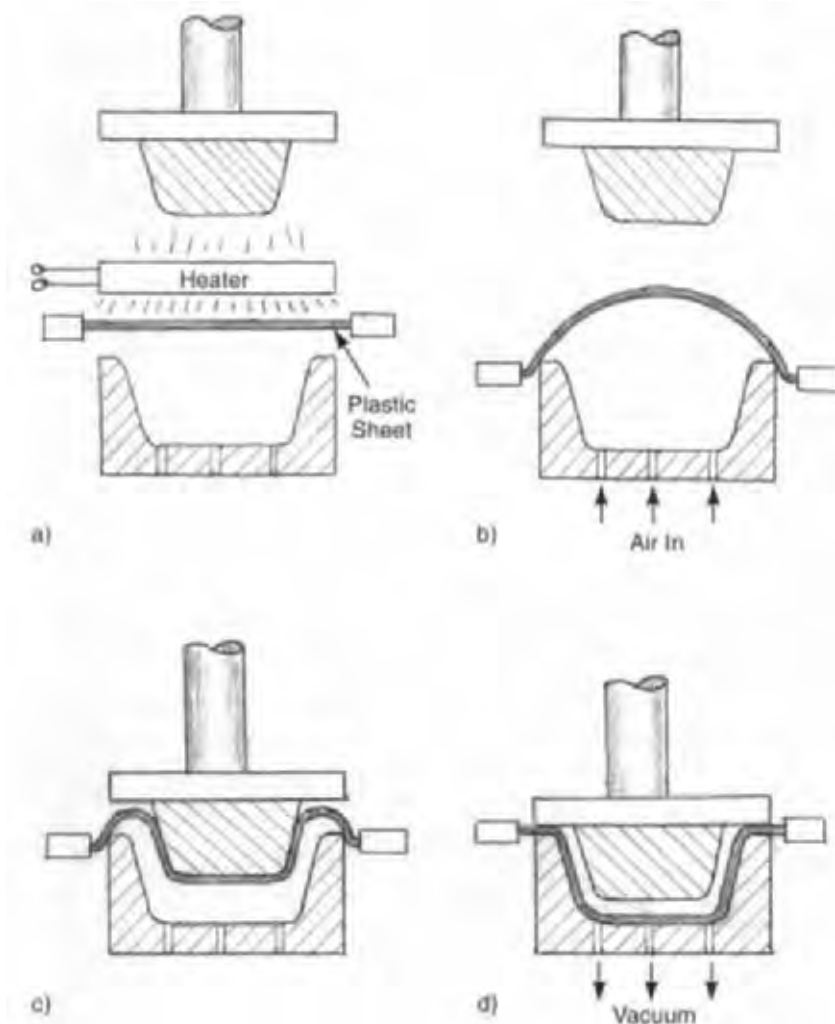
D8 Pressure bubble plug assist forming. a) The plastic sheet is placed above the mold and is heated. The plug above the sheet is also heated. The heater is then retracted. b) Air pressure from below causes the sheet to form a bubble, uniformly stretching the sheet. c) The plug descends against the bubble, bringing the sheet into close proximity to the female mold. d) A vacuum from below the mold draws the sheet against the mold where it cools and solidifies. The mold and plug then open and the formed workpiece is removed, similarly as illustrated in Fig. 4D4.
